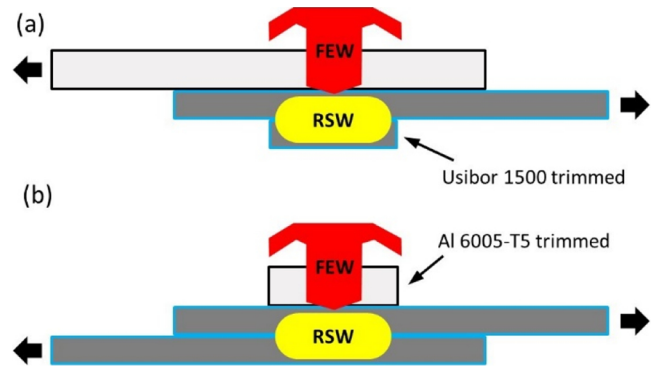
Schematic representation of trimmed tensile shear tests performed: (a) Usibor 1500 trimmed for friction element welding tensile testing; (b) Aluminum 6005-T5 trimmed for resistance spot welding tensile testing.
